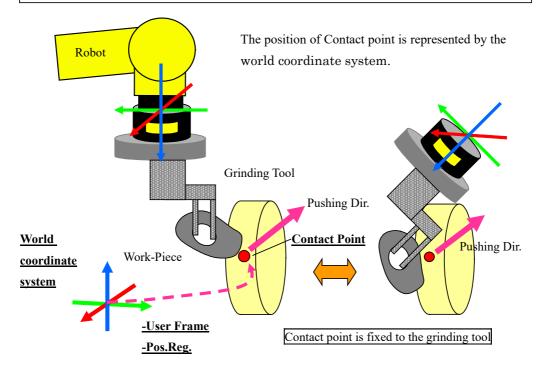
(h) Example 1 of setting USER to "3-Axis FS ContactP. Position"
